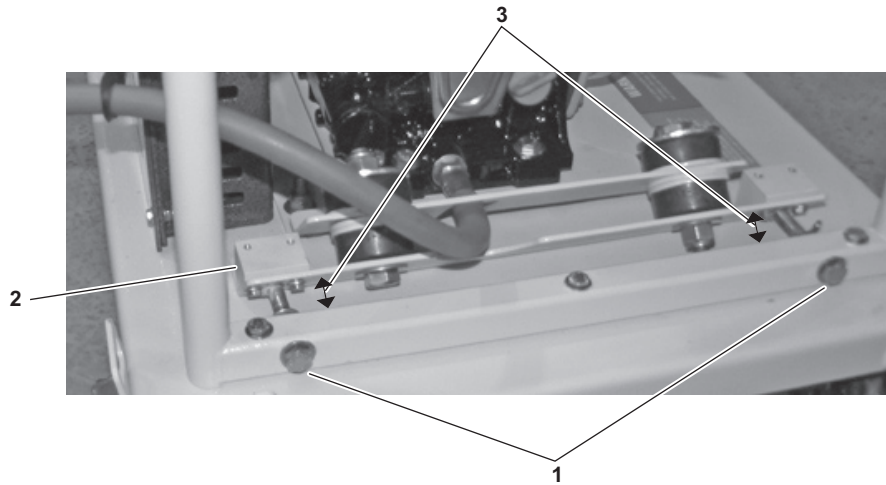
Jacking Bolts of the Tensioning Assembly
